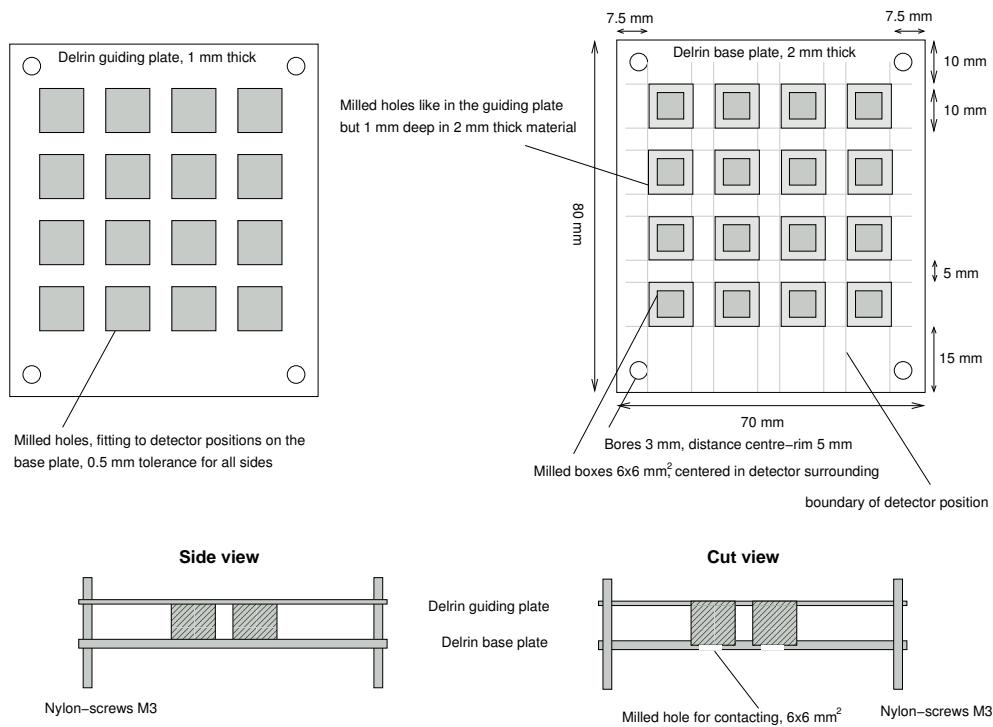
Technical drawing of the Delrin holder with the dimensioning of the components. The holder is designed to host 16 detectors. Using the same holders, a 3-dimensional array of detectors can be built by stacking the layers.
